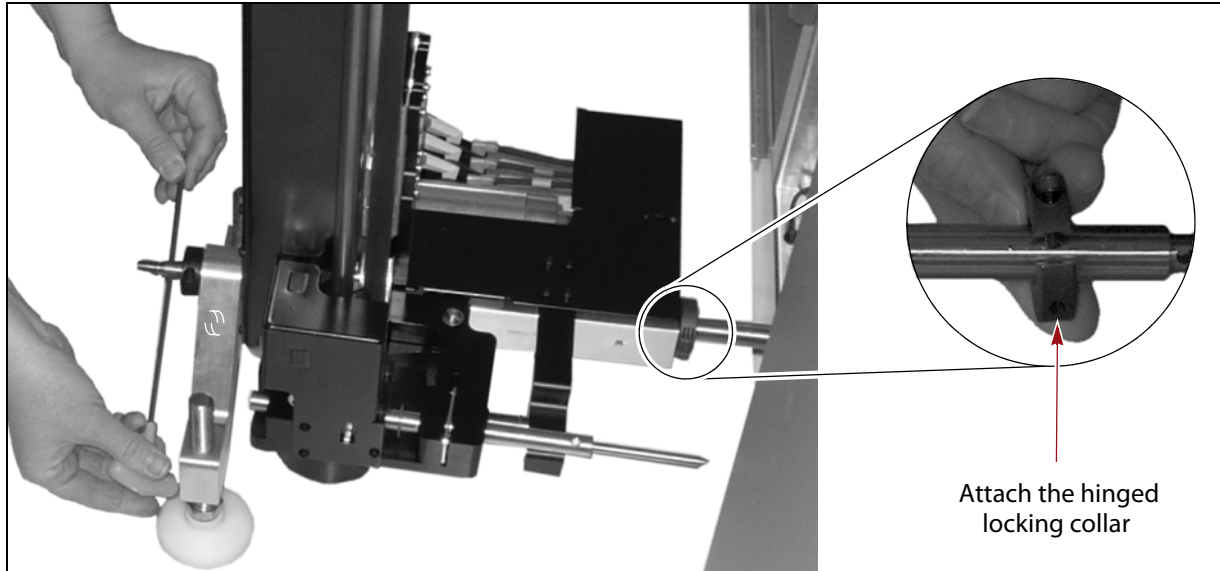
Install the hinged locking collar and disconnect the VAX column stand extension rod from the Thomson rod.
